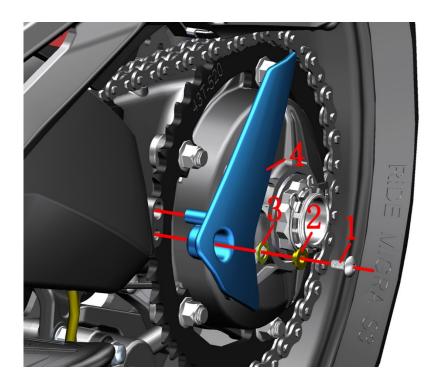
Rear wheel, swinging arm assembly		Sprocket baffle	CHK
